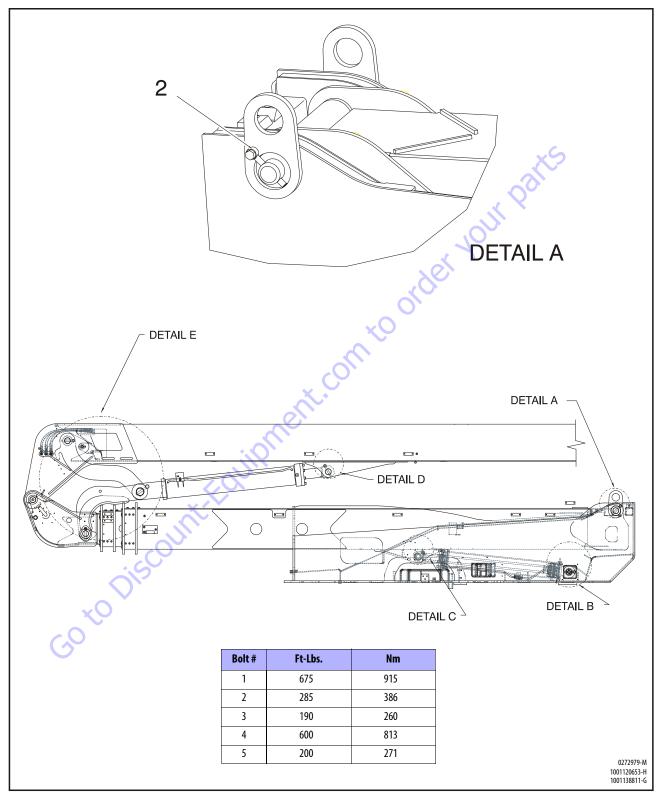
Boom and Cylinder Installation Torque Values - Sheet 1 of 3
